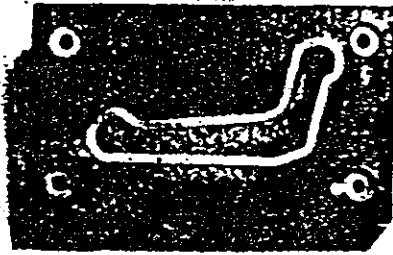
A generating tool can be used to cut almost any shape from plate material. The tool is a simple envelope of the shape to be machined. (Courtesy of the Cincinnati Milacron Company.)
